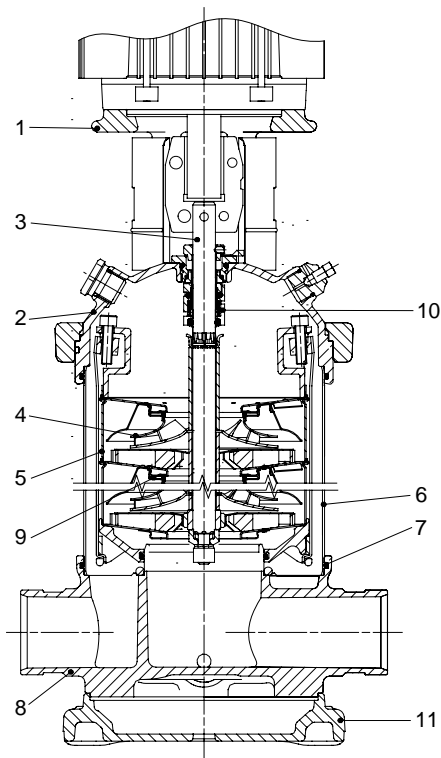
Sectional drawing of CRN 3, 5, 10, 15, 20 SF
